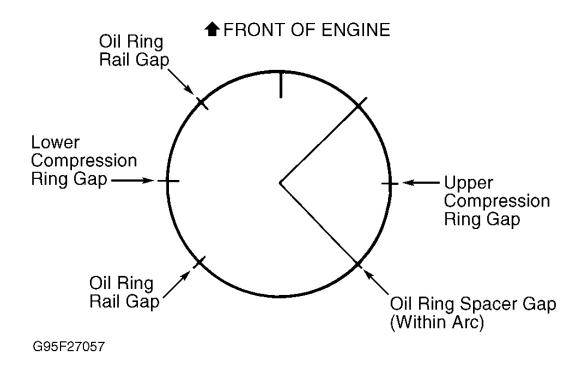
Positioning Piston Ring End Gaps Courtesy of GENERAL MOTORS CORP.
